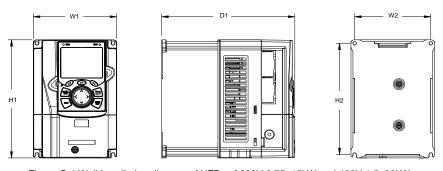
Wall installation diagram of VFDs of 220V 0.75-15kW and 460V 1.5-30kW
